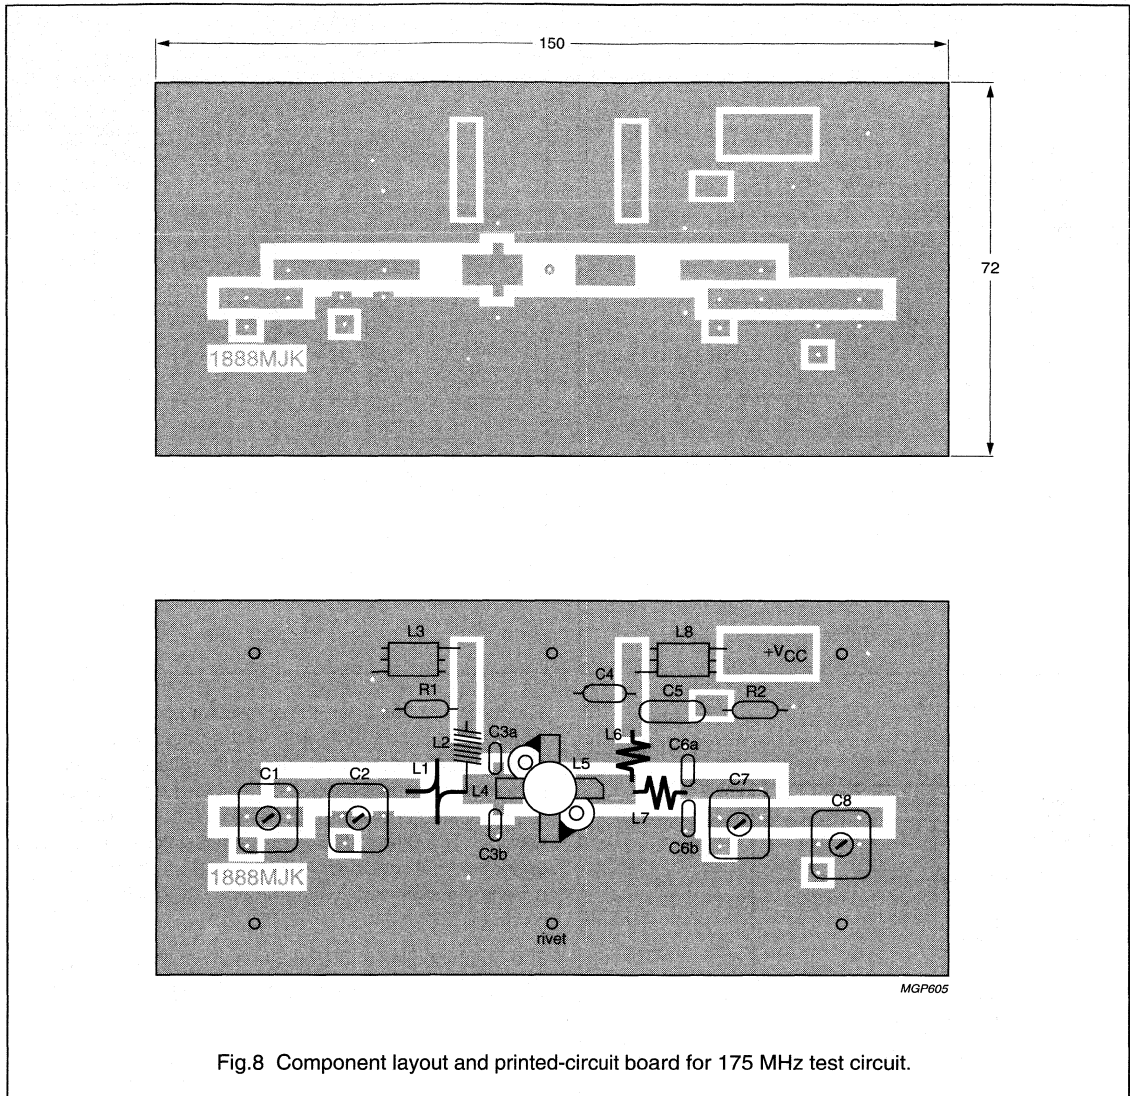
Component layout and printed-circuit board for 175 MHz test circuit.
